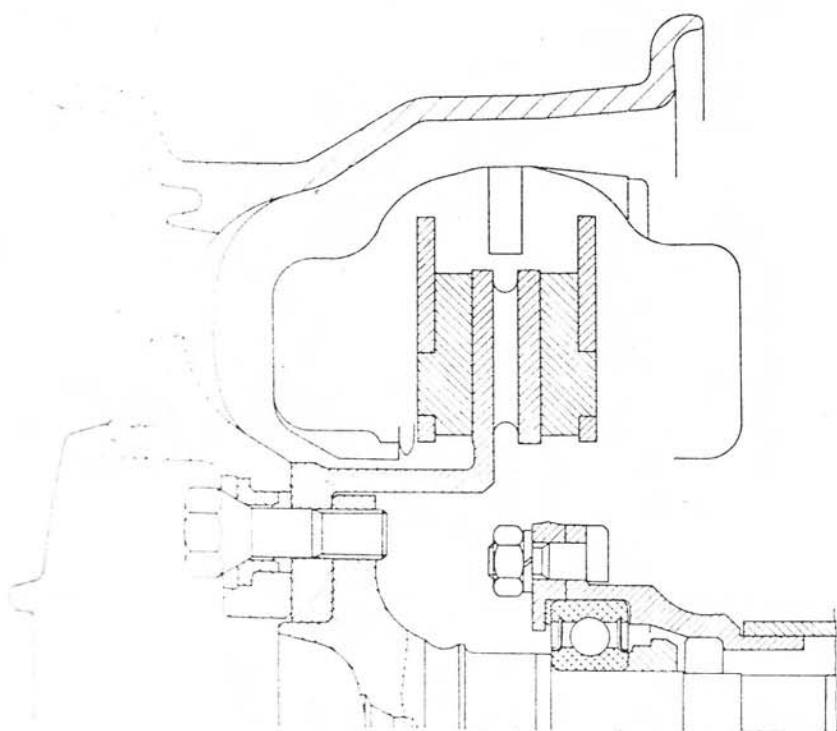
Scrap section view of L.H. rear wheel and axle shaft.
